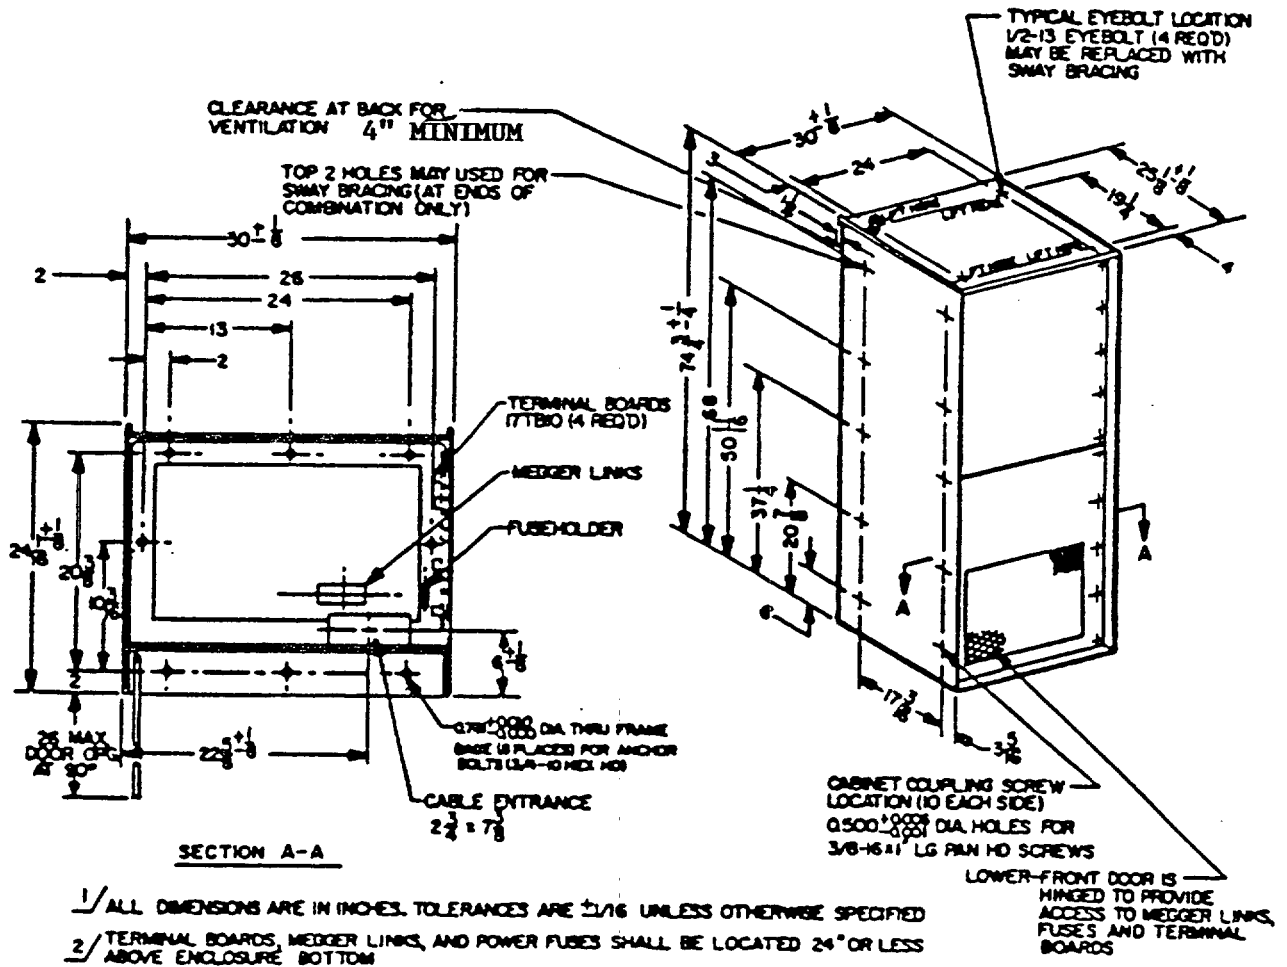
8, 12, and 16 kW power supply, outline drawing.
